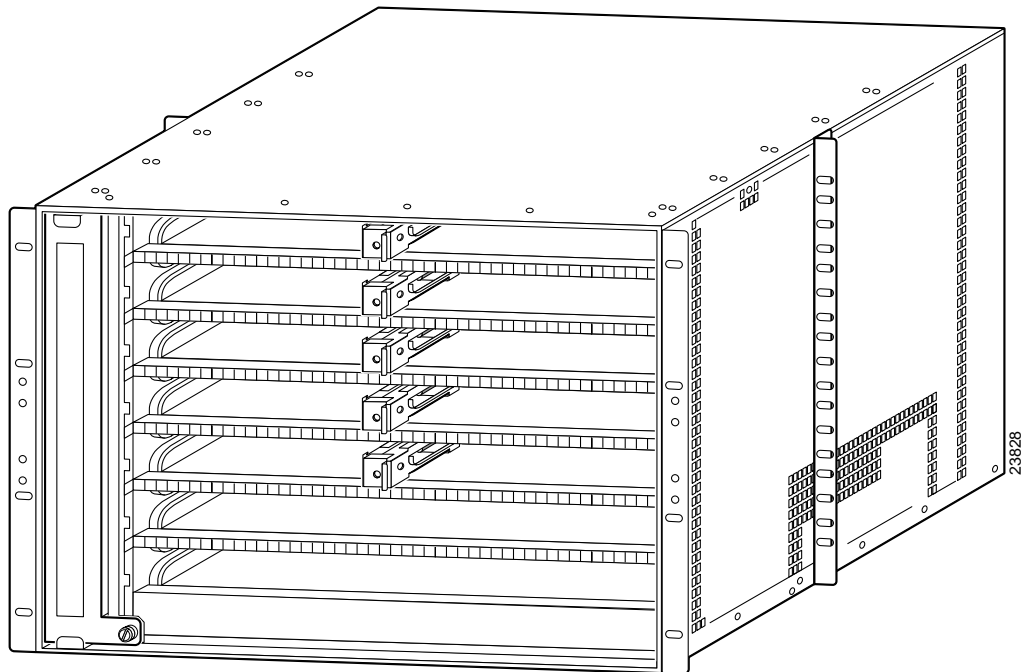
MGX 8230 Chassis Front View with 19-Inch Mid-Mounting Bracket
